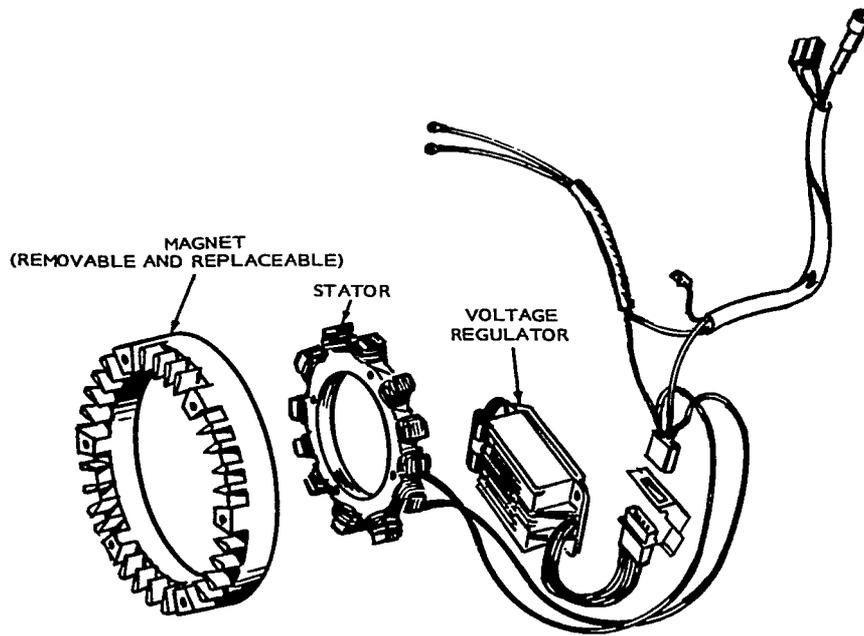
WICO 20 AMP FLYWHEEL ALTERNATOR ASSEMBLY (BEGIN SPEC T)
